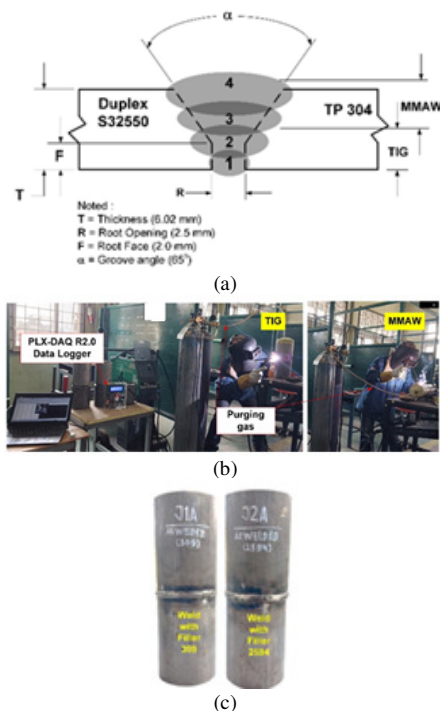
Dissimilar welding processes for Duplex S32550 and TP304: (a) joint design and welding sequence, (b) TIG-MMAW welding process, (c) results of welded joints with filler 309 (J1A) and 2594 (J2A).
